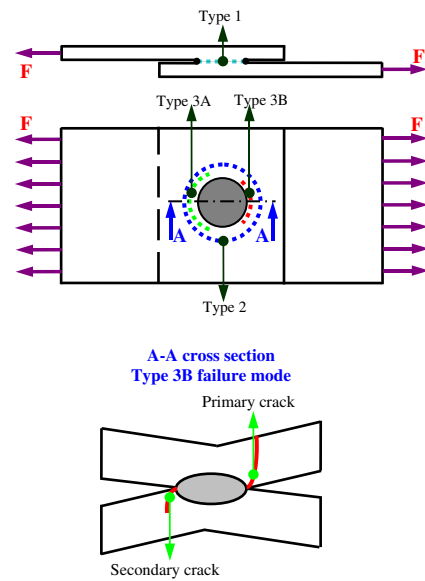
Depiction of the failure modes observed in spot welded joints [7].
